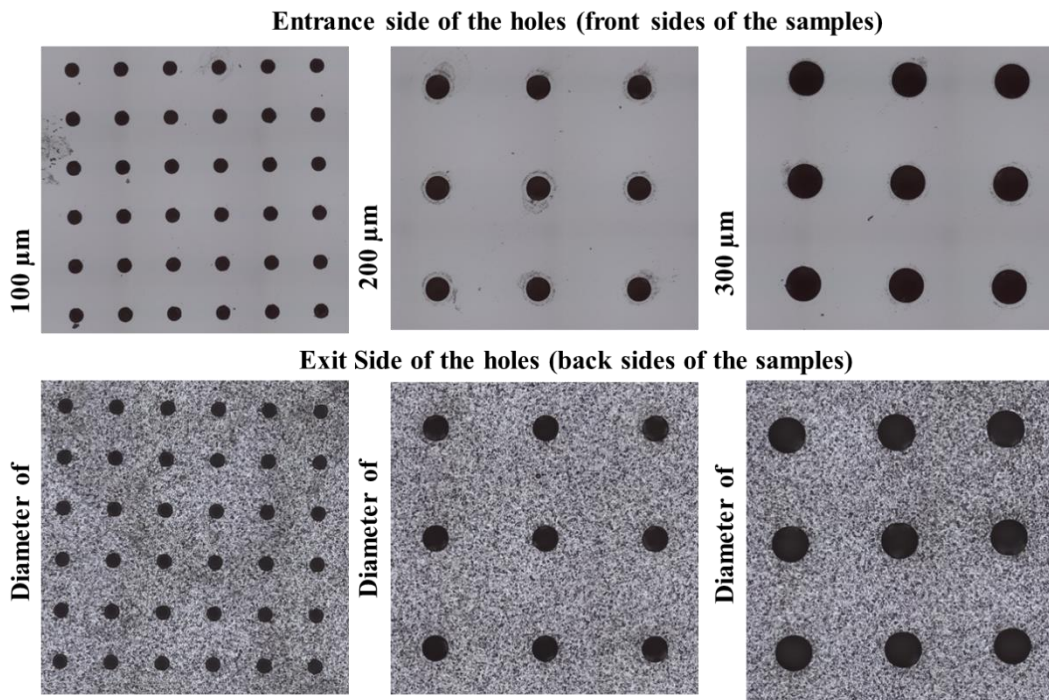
Examples of holes with different diameters (100 μm, 200 μm, 300 μm) produced with the proposed workpiece holding extension
